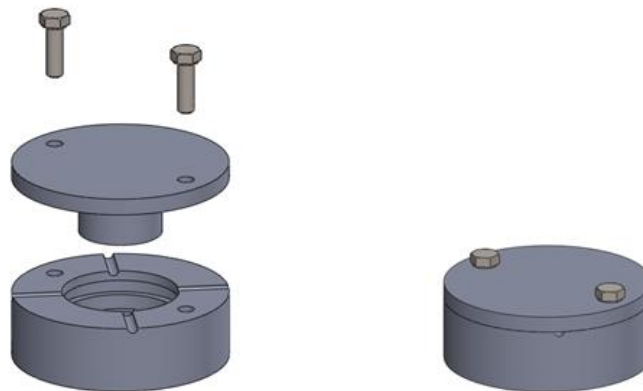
Silicone Ring mould – SolidWorks (A.O.P.)
